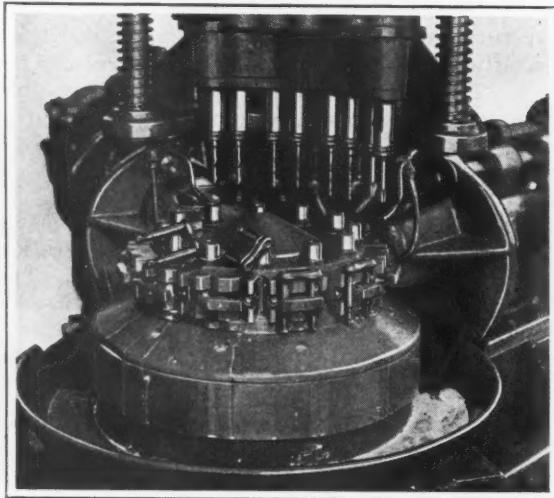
Millholland Drilling Machine Set up for Machining Spring Shackles
